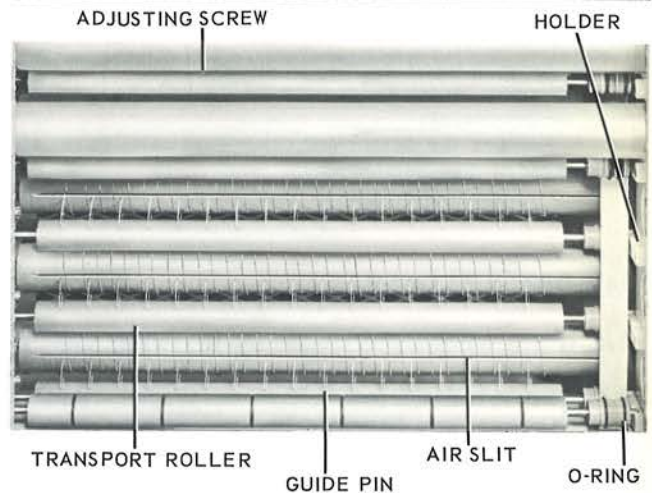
AIR TUBES AND TRANSPORT ROLLERS
